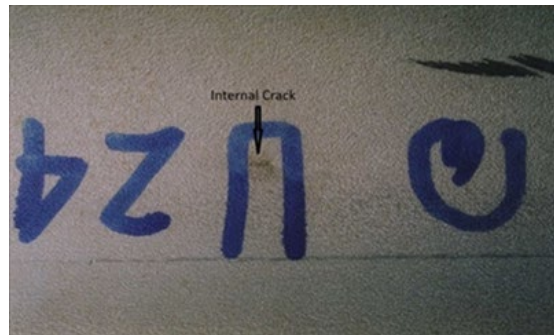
Pipe internal, showing a short crack of not more than 5 mm.
